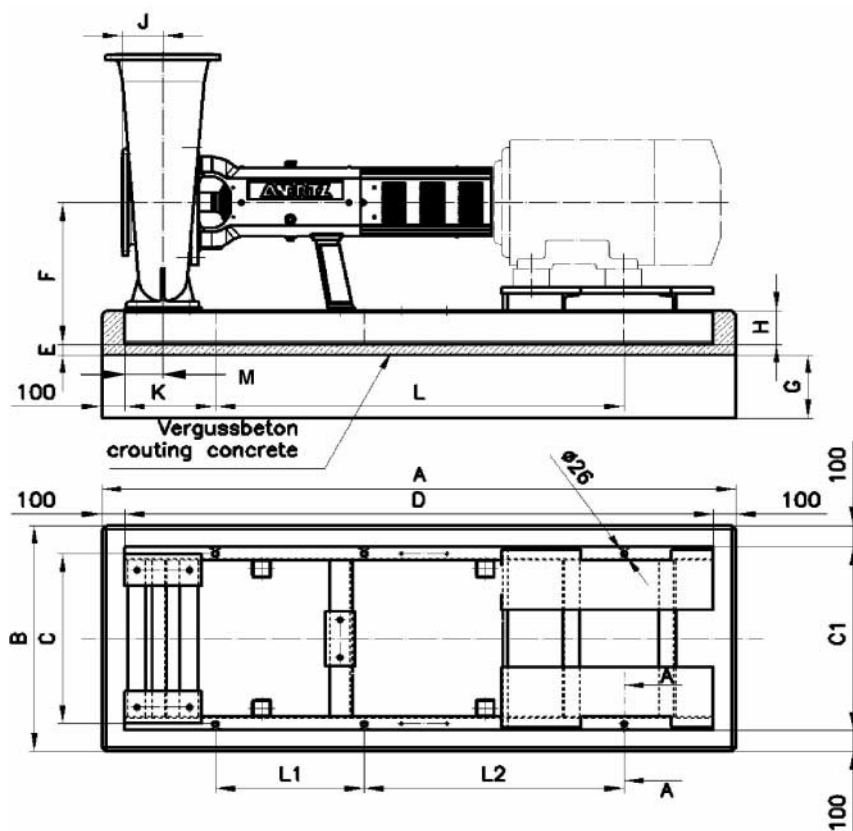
Foundation drawing (dimensions in mm binding)
